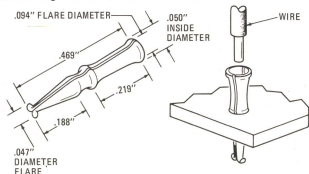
MINIATURE TUBULAR TERMINAL fits snugly into $\frac{1}{16}$ -inch hole and can be used for component or wire connection.
